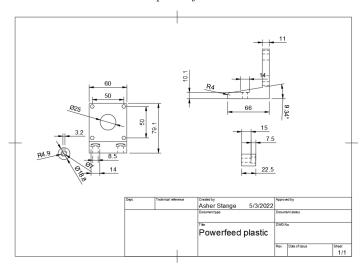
The technical drawing for the plastic base is in millimeters NOT inches.
